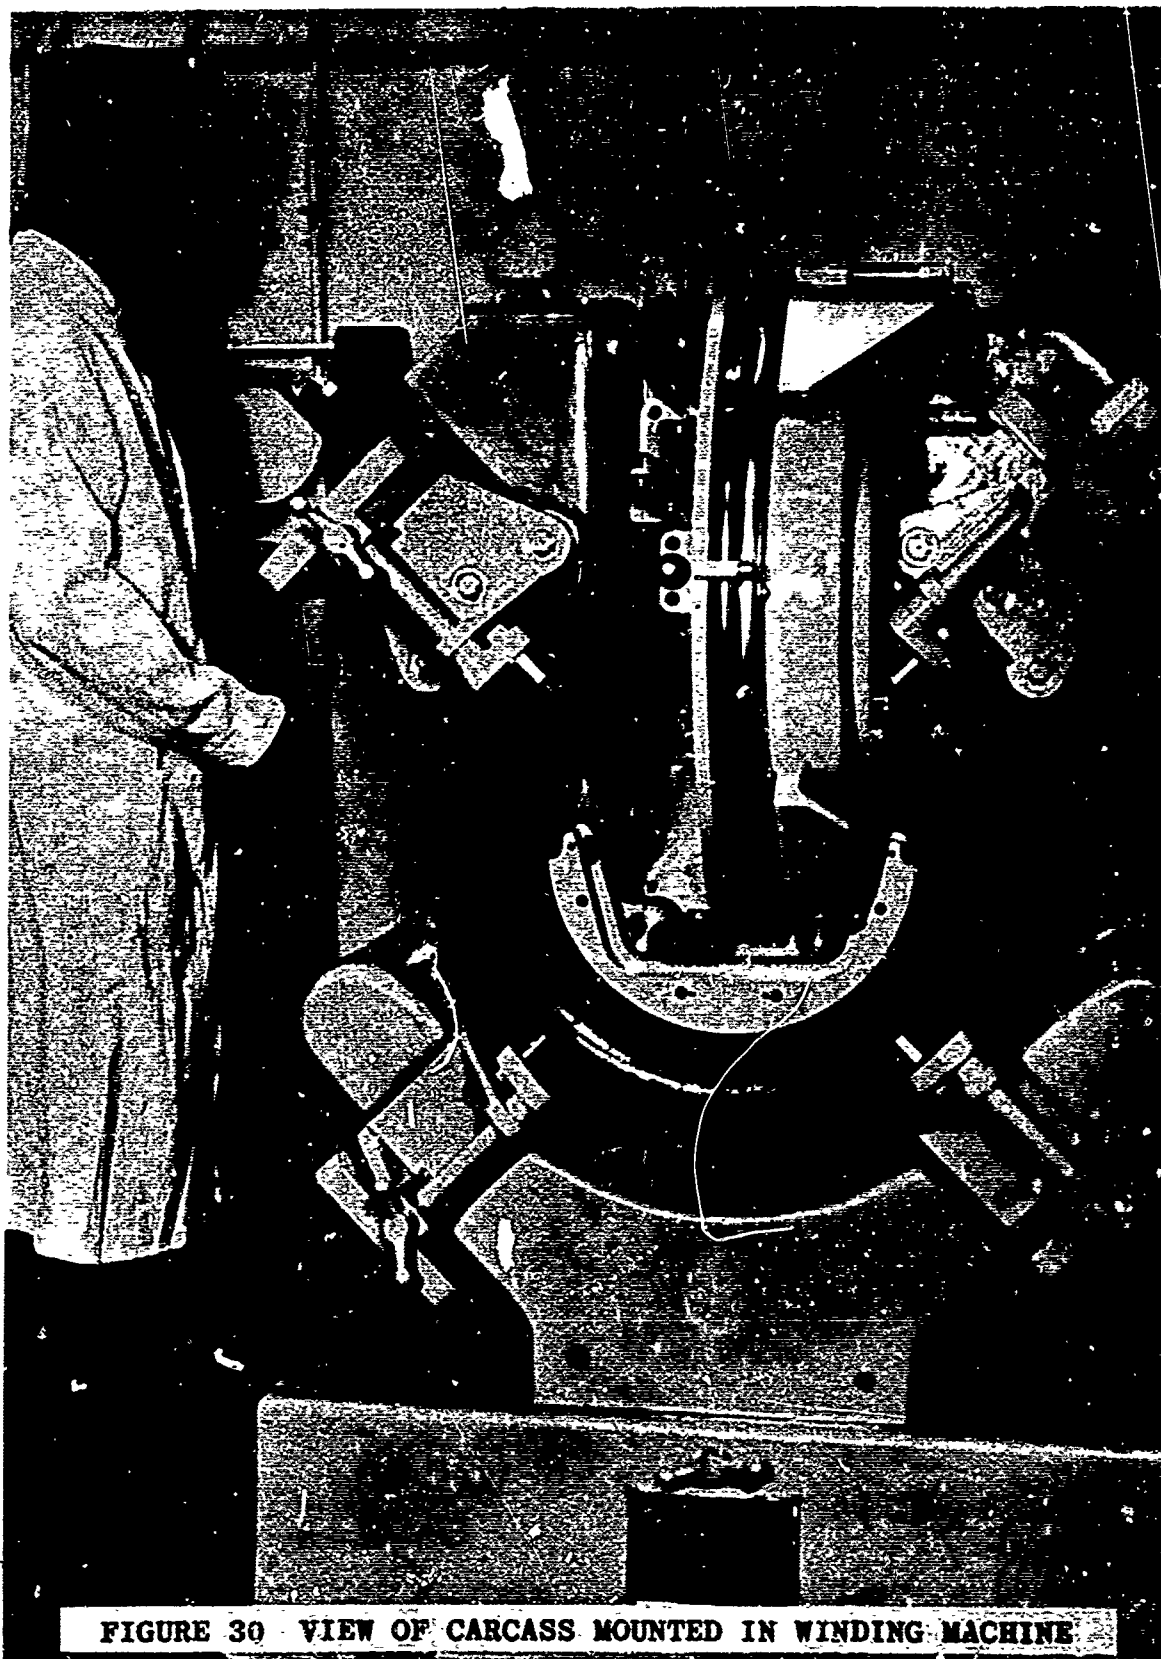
VIEW OF CARCASS MOUNTED IN WINDING MACHINE
